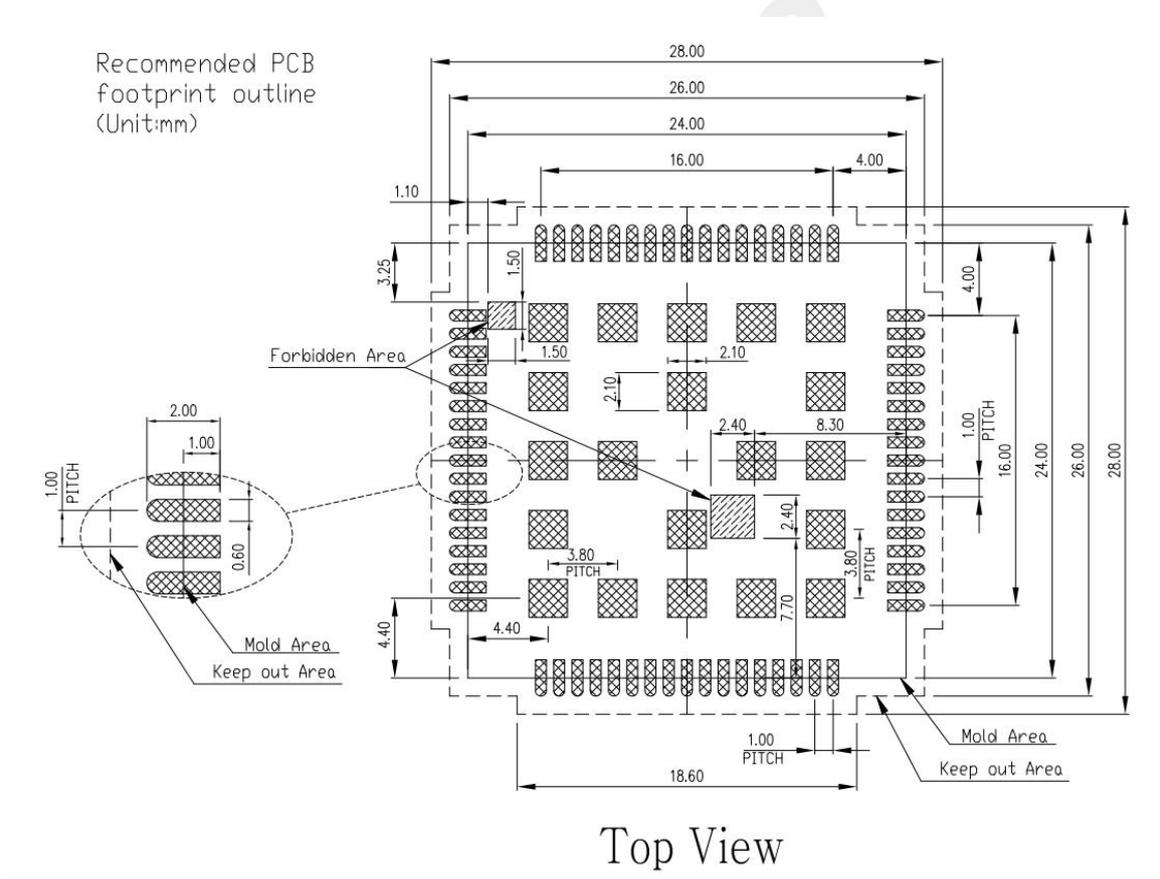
Recommended PCB footprint outline for A7670E (Unit: mm)
